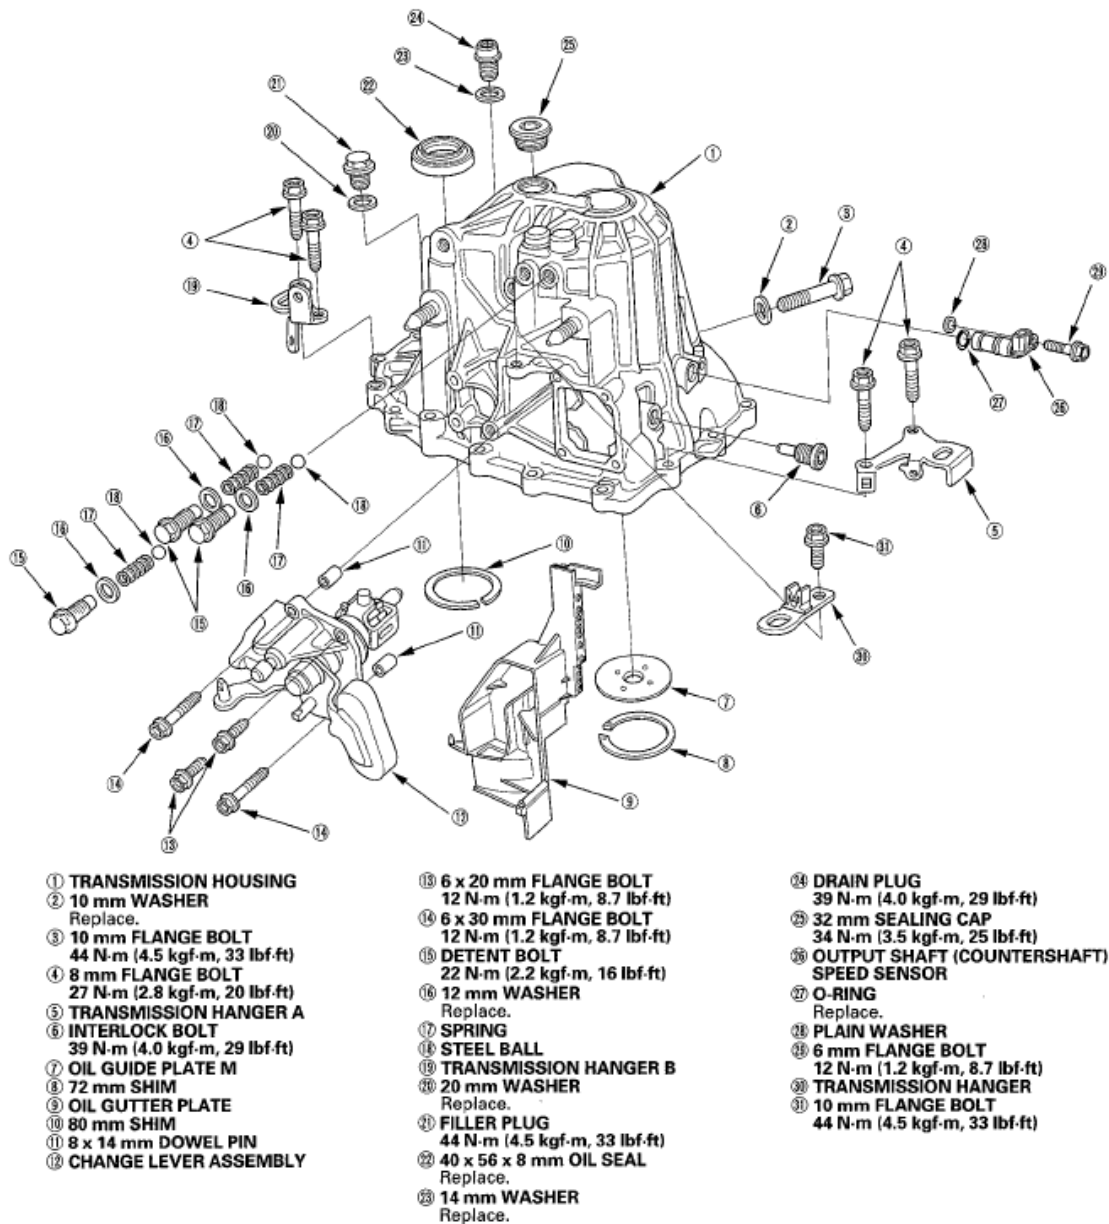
Exploded View Of Transmission Housing With Torque Specifications
